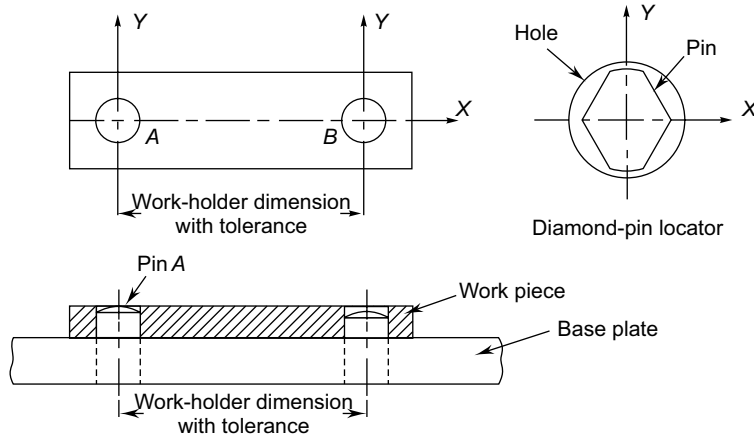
The round locator used in locating a work piece with an already finished hole
